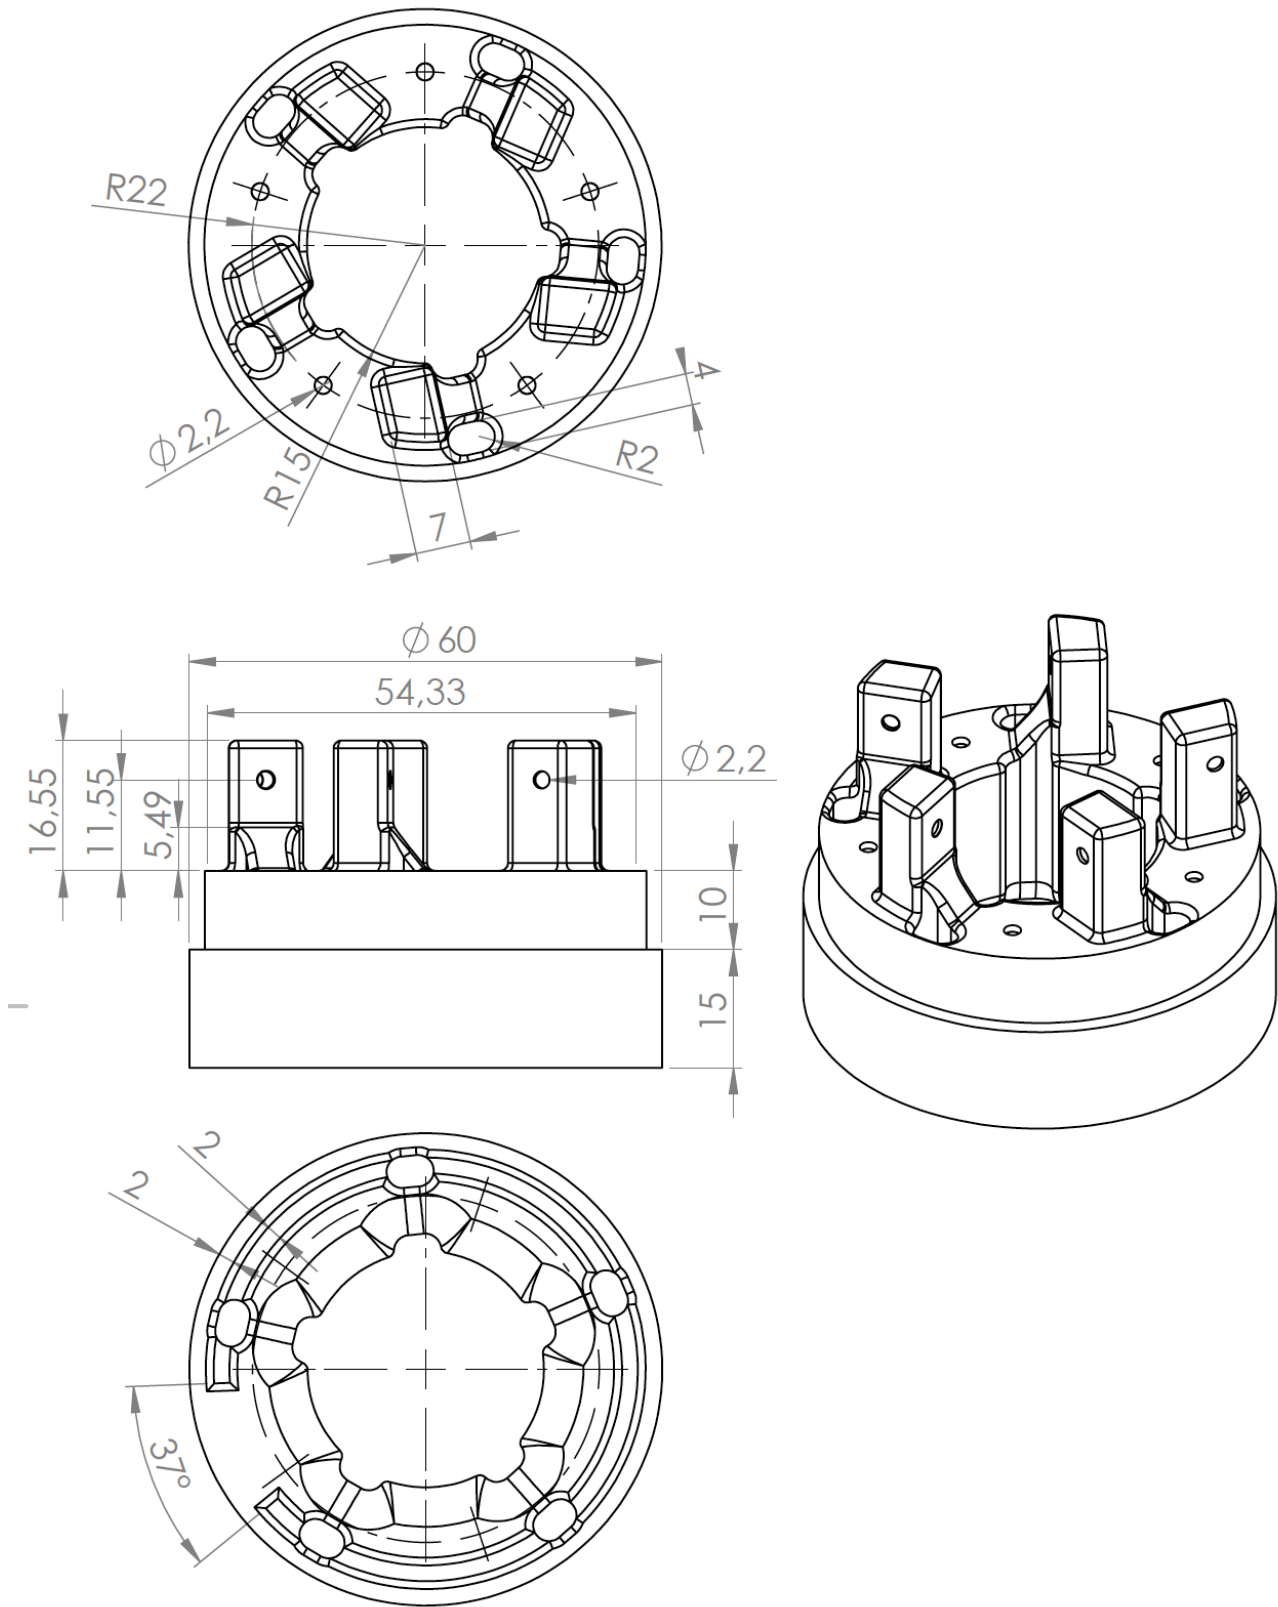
Selection of component views and dimensions (mm), C7 - Gear base
